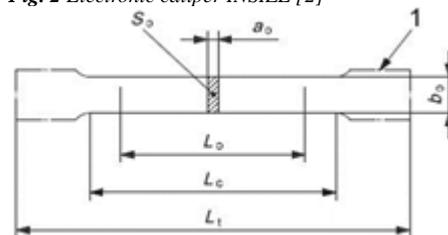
Model of punched test body with a rectangular cross-section [3].
